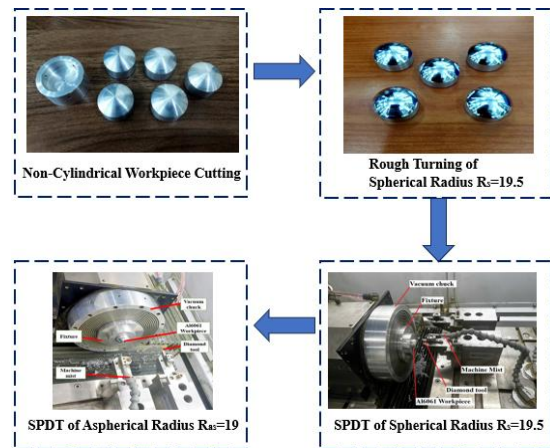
Schematic diagram of machining aspherical surface workpiece
